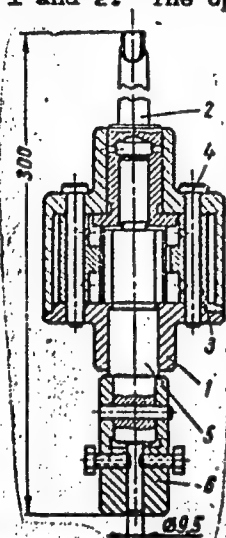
Impact tool: 1 - body; 2 - shank; 3 - hammer; 4 - pin; 5 - driven shaft; 6 - tool holder.
